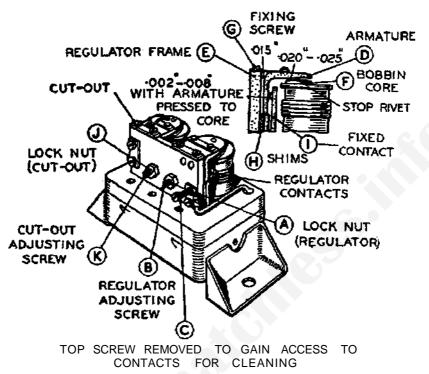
REGULATOR AND CUT-OUT ADJUSTMENT AND SETTING.
